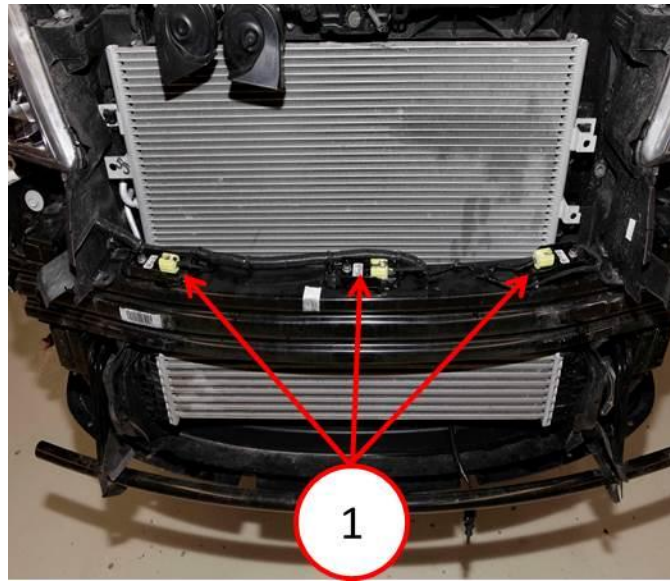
Pedestrian Protection Sensor Jumper Harness
